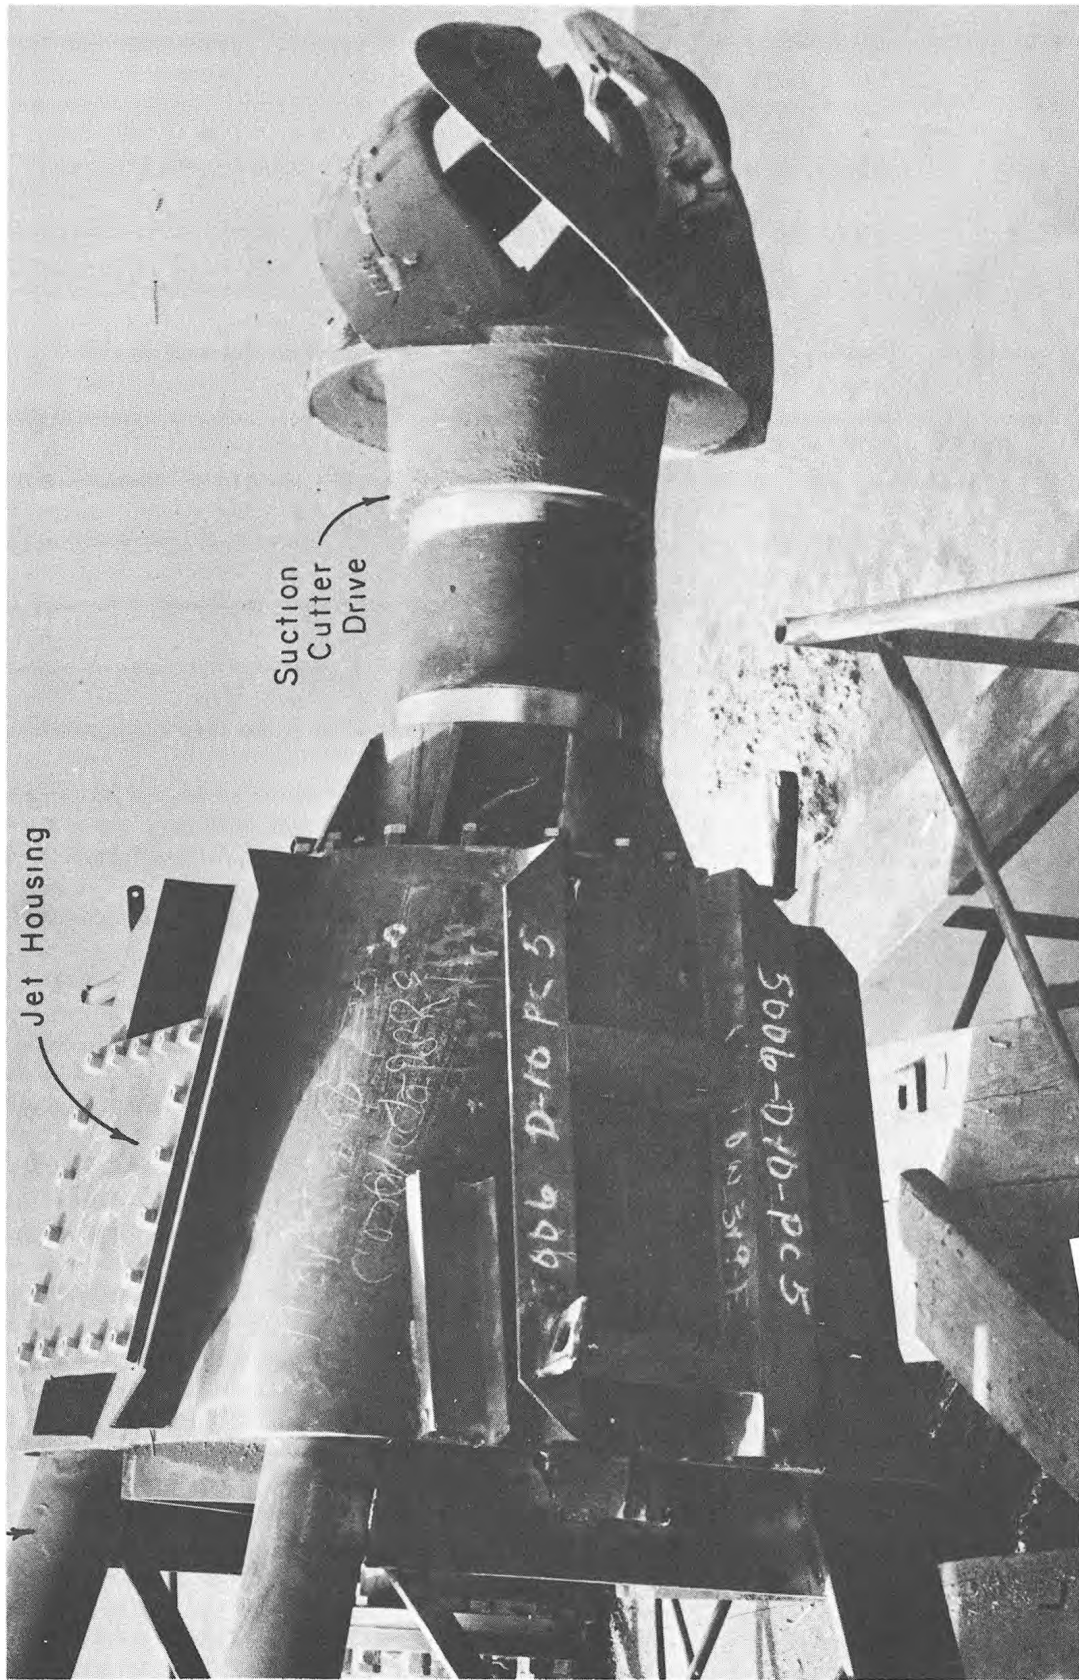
Cutter-suction assembly and jet on a cutterhead.
